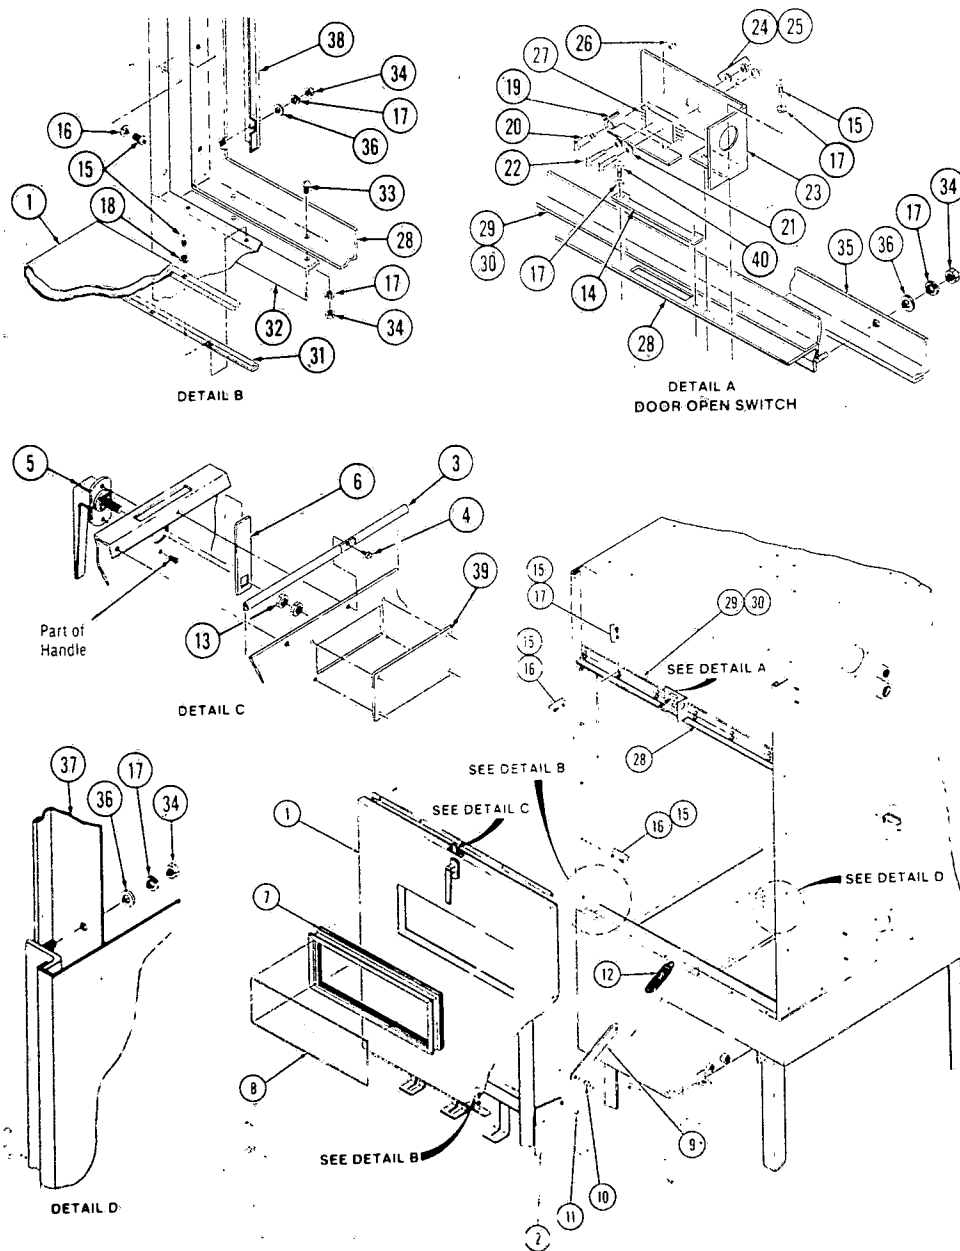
DOOR ASSEMBLY: Hinged. (Units shipped before 8/84)
